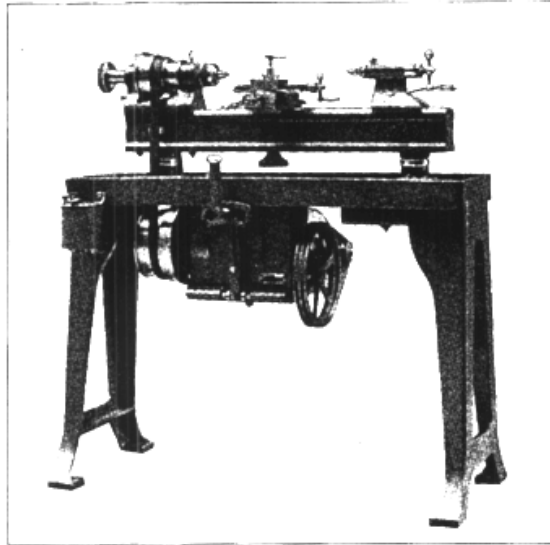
Rivett Series 505, ball-bearing lathe on oil pan and floor legs with Speed Box Motor Drive, hand lever control and Jack Pedestals
